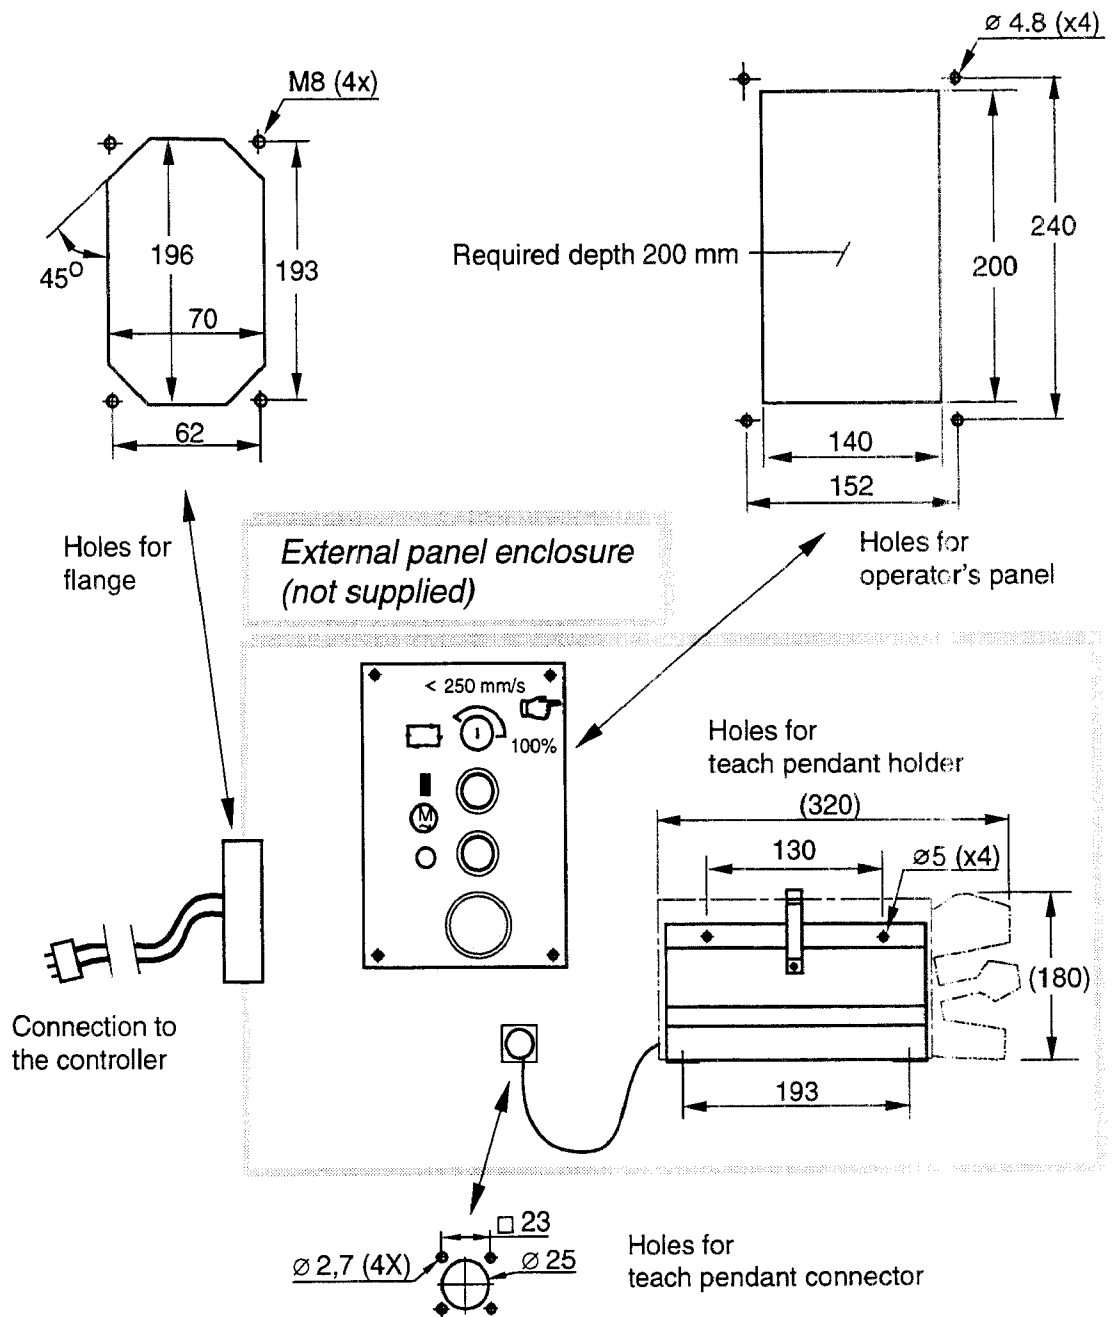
Required preparation of external panel enclosure (all dimensions in mm).
